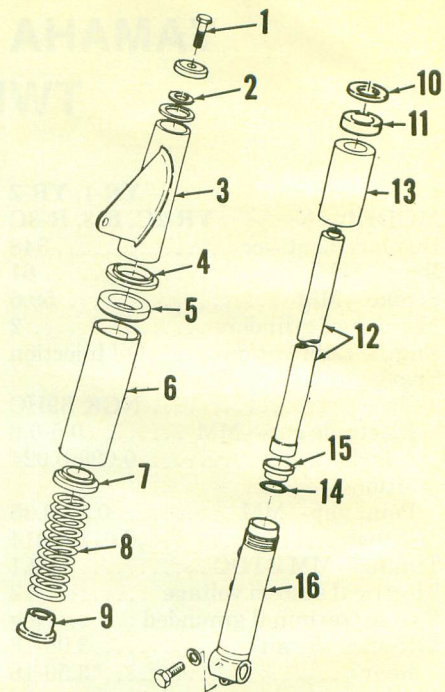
Exploded view of front suspension system used on YR-1 and YR-2 models.
